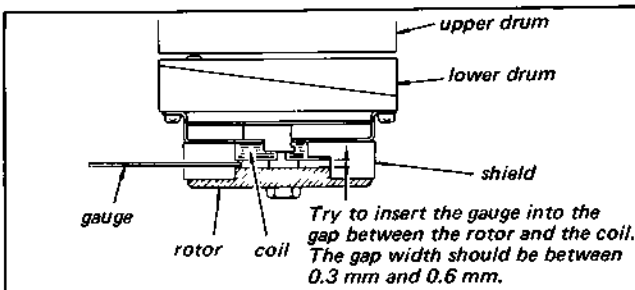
Checking the motor gap width after replacing the drum assembly
